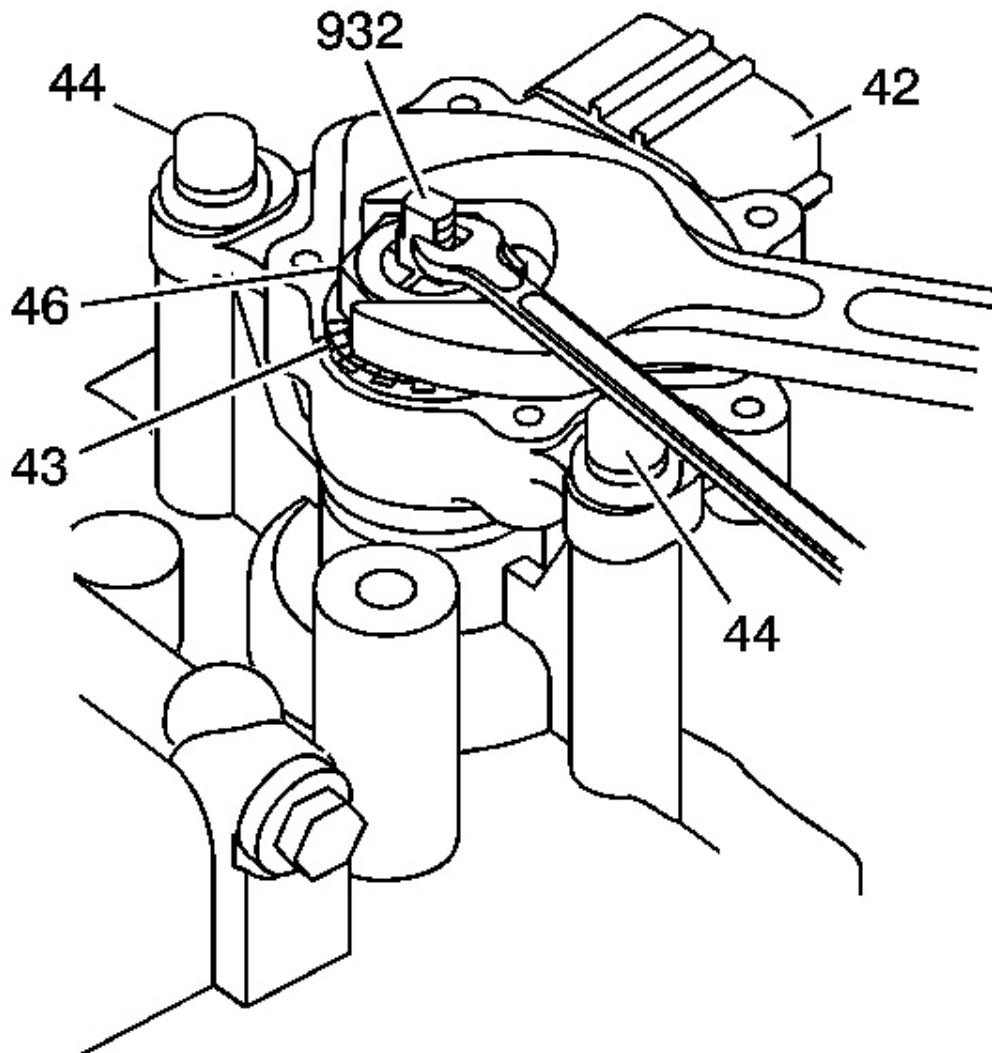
Tightening The Locknut & Flanged Bolt/Screws
